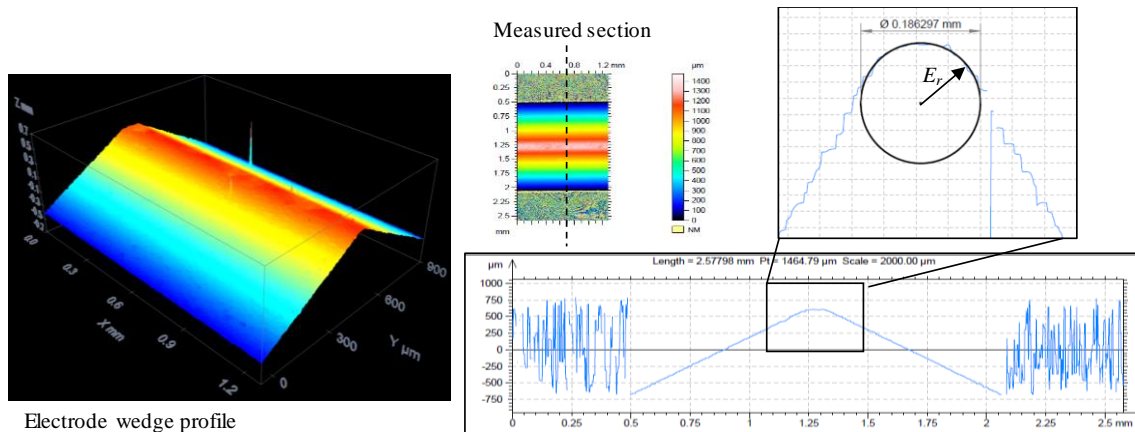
Example of a wedge radius after erosion (machining depth=0.5 mm).
